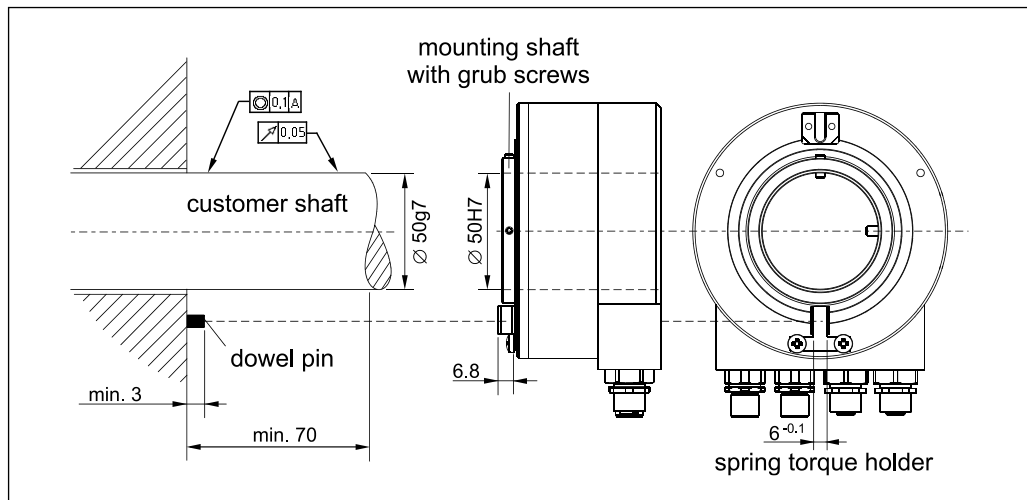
Type with dowel pin and spring torque holder with  $\varnothing 50H7$
